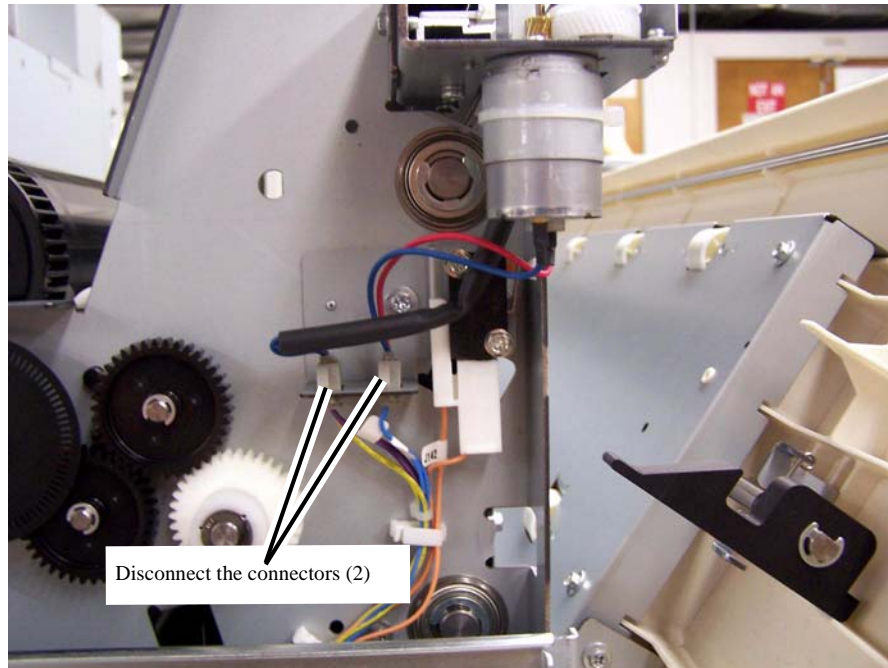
Disconnecting the Cutter Motor and Cutter R/H and L/H Switch connectors
